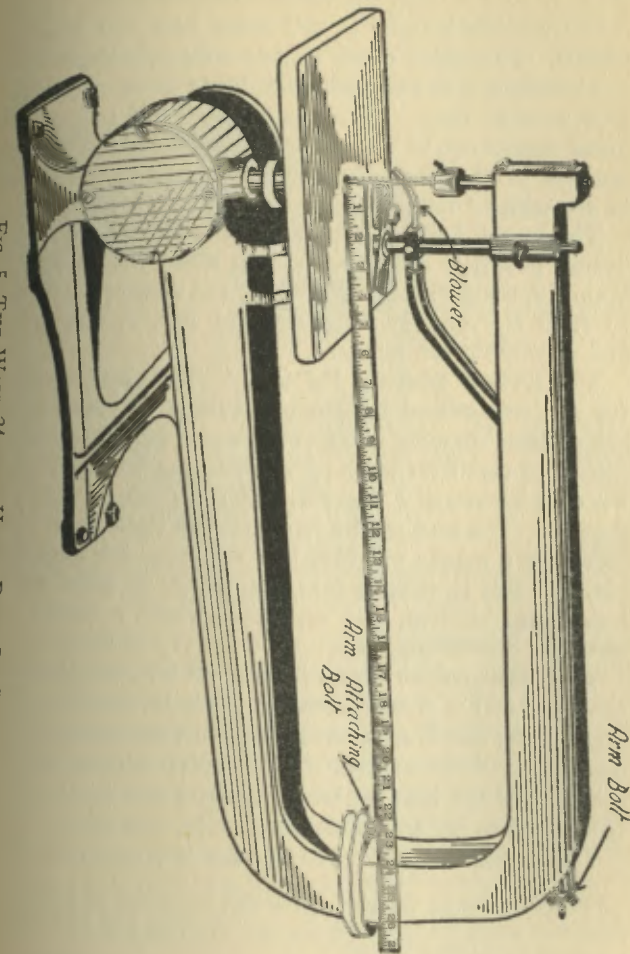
THE WARD 24-INCH HEAVY DUTY JIG SAW
